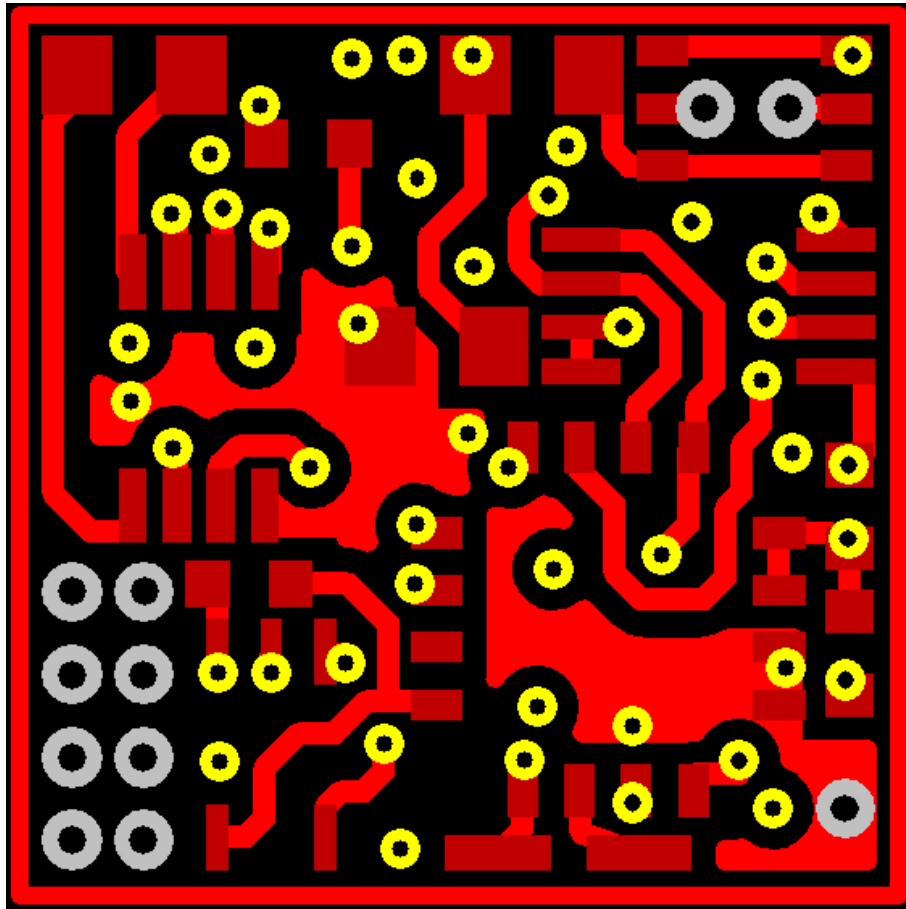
Top Layer PCB Layout of four channeled telemetry unit of the dimension 10 mm x 10 mm
